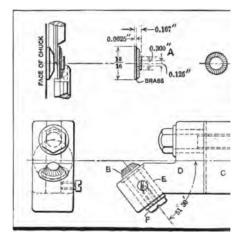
Knurl and Knurling Tool-holder Form cf Radial Teeth
